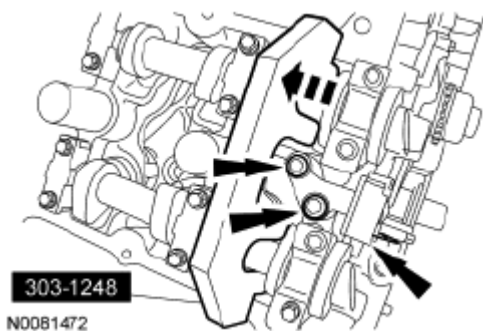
Locating RH Secondary Timing Chain Tensioner Bolts
